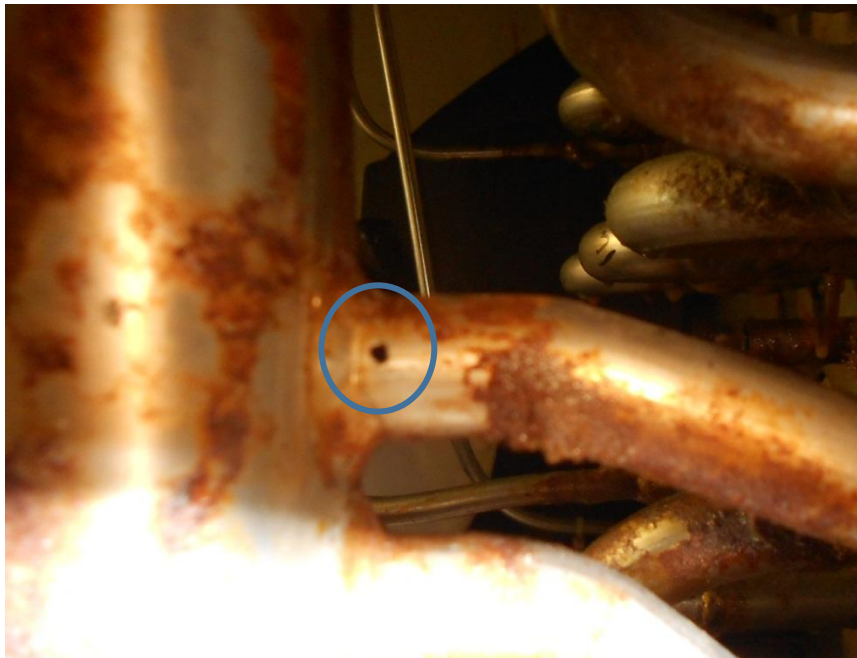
Typical hole in a 304L stainless steel coil tube caused by chemical attack.
